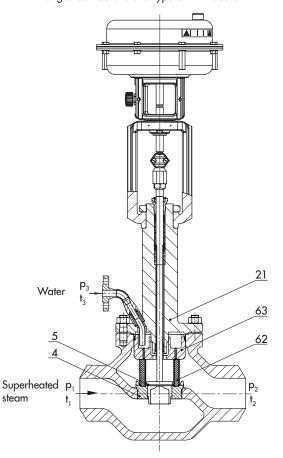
Type 3281-7 Pneumatic Steam Conditioning Valve with insulating section, welding ends and Type 3277 Actuator
